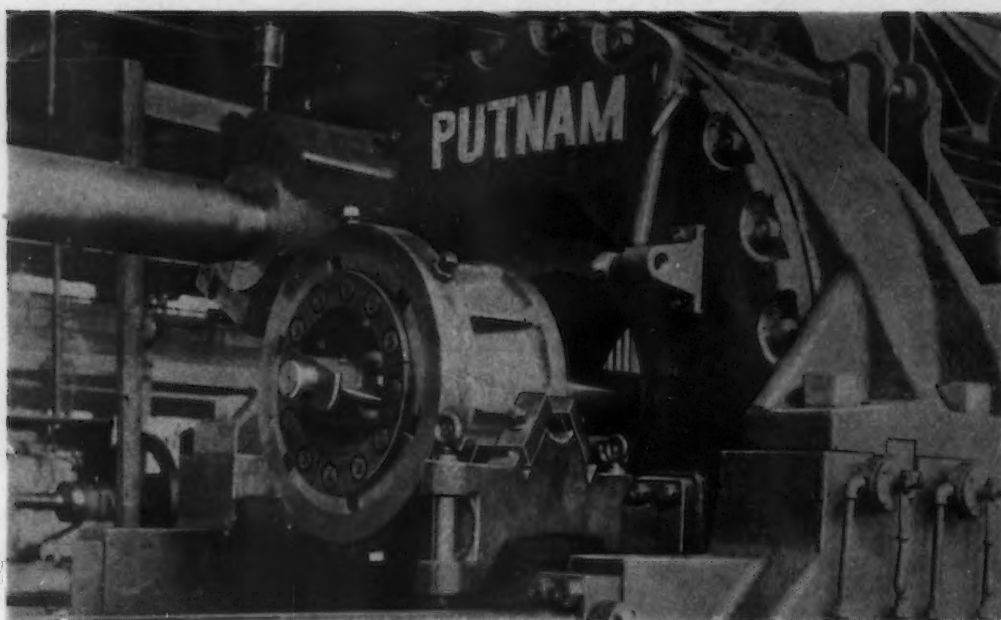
Tool-holder suspended on mandrel as it is being removed from cutter head. Duplicate tool holders are furnished for each range of billet sizes. One set of tools is being sharpened while the other is in use.
